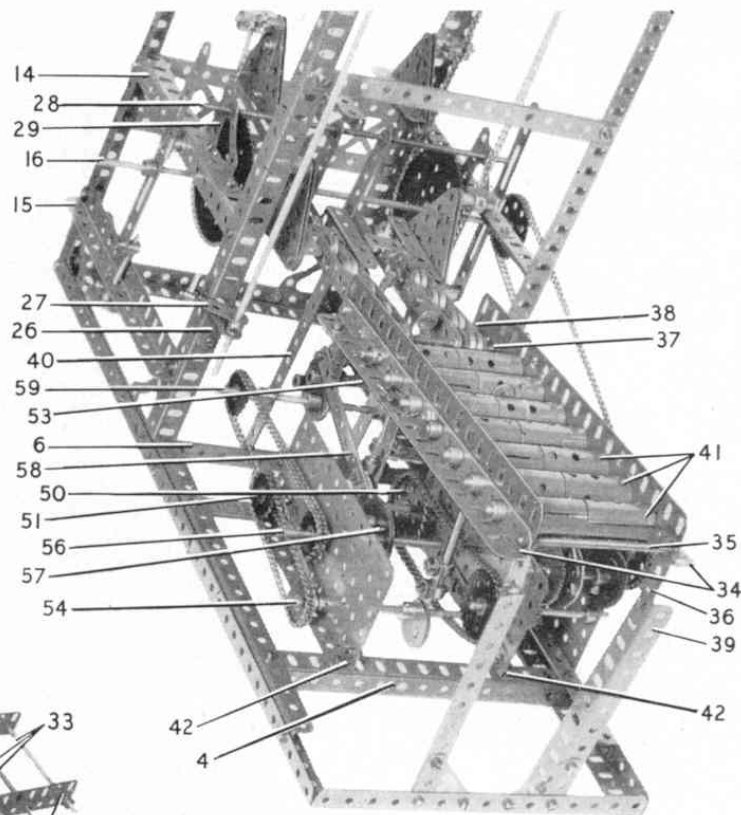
A close-up view of the feed-in and its drive mechanism.
